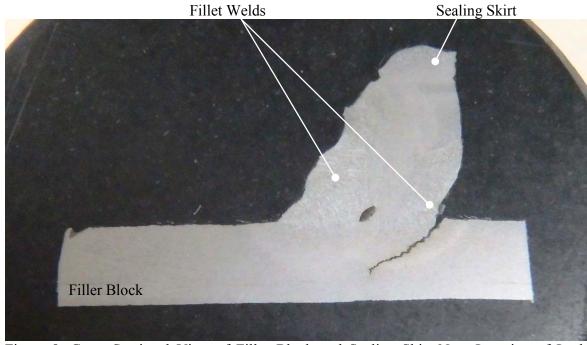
Cross Sectional View of Filler Block and Sealing Skirt Near Location of Leak Showing Singular Crack Propagating Across the Filler Block.
